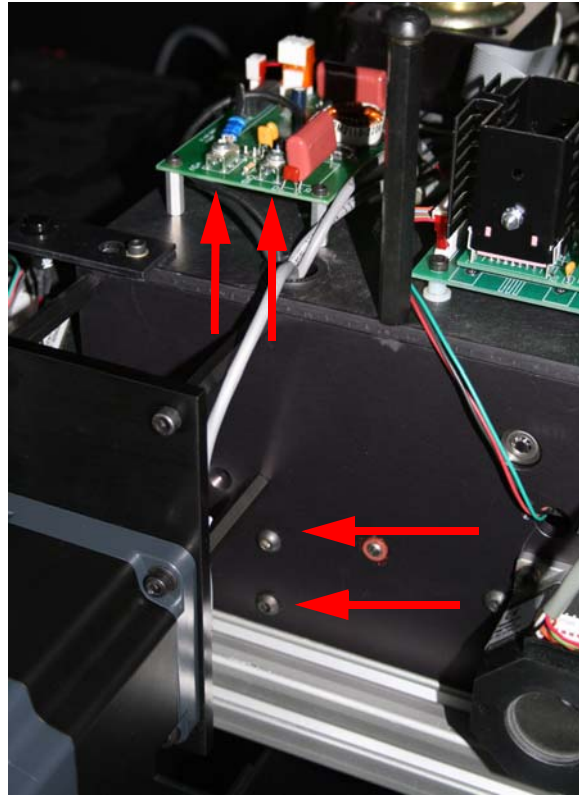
Disconnect the terminal lugs from the Welder Power Controller. Remove the two screws.
